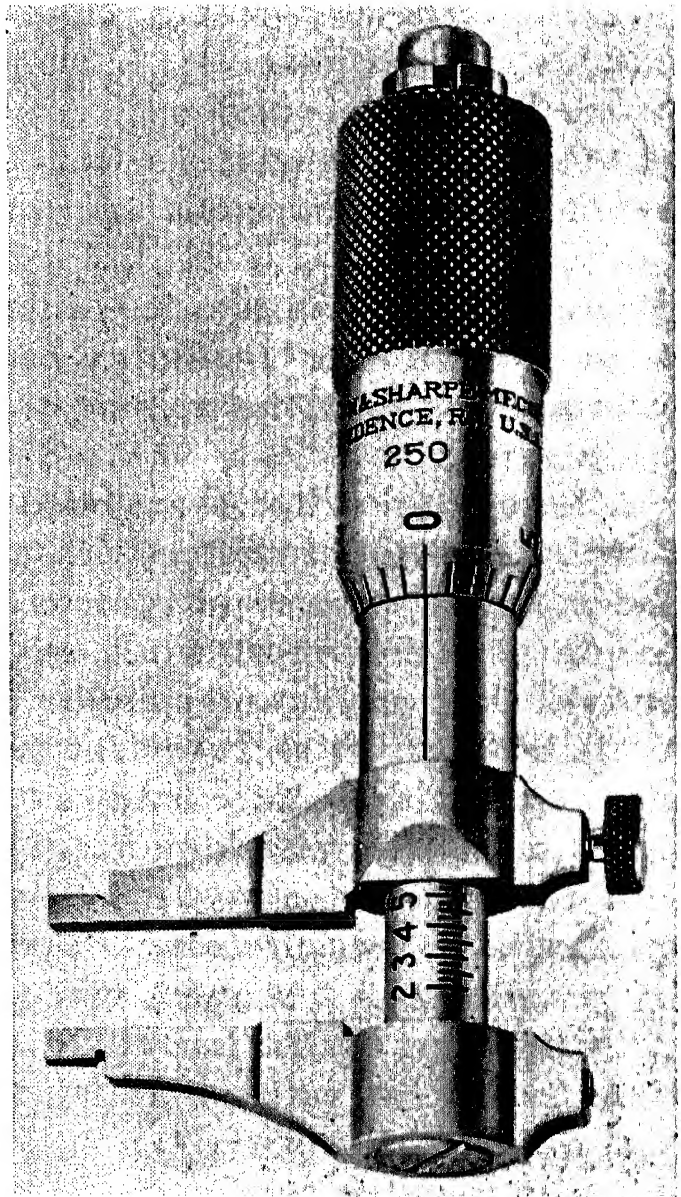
An inside micrometer caliper. (Courtesy Brown and Sharpe Mfg. Co.)
